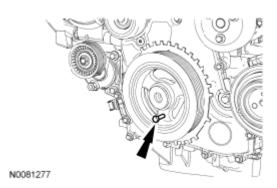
Locating Crankshaft Pulley And Crankshaft Courtesy of FORD MOTOR CO.
